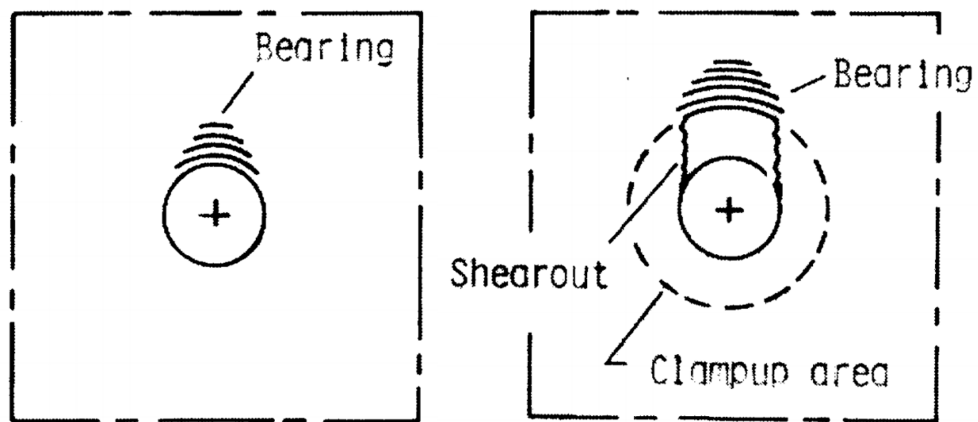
Figure 4(a) and (b) from Crews. Left: (a) Bearing failure mode. Right: (b) Combined bearing and shearout failure modes seen in a joint with clamp-up.
